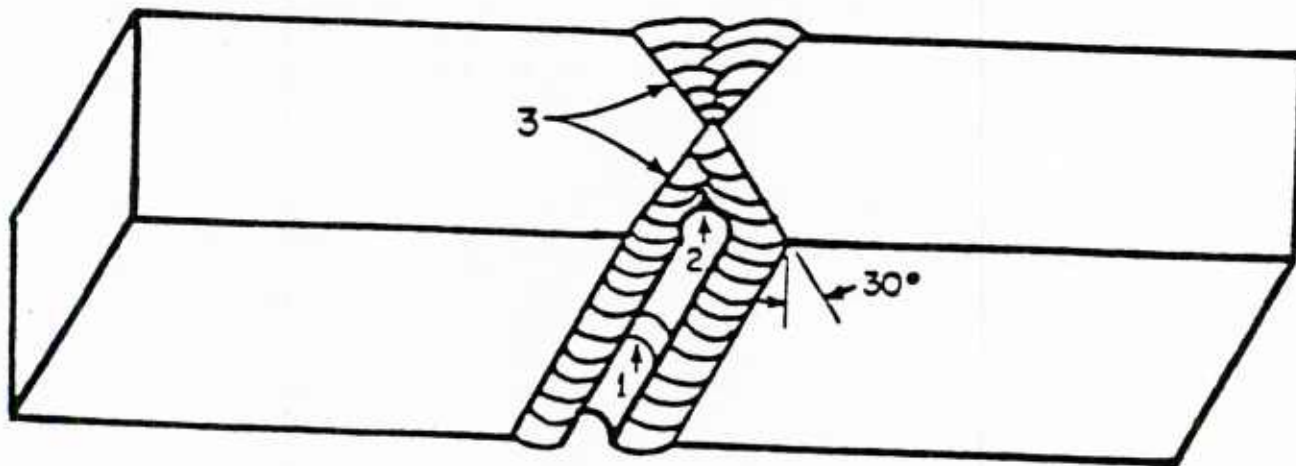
SPECIMEN USED FOR BLAST INDUCED FRACTURE
